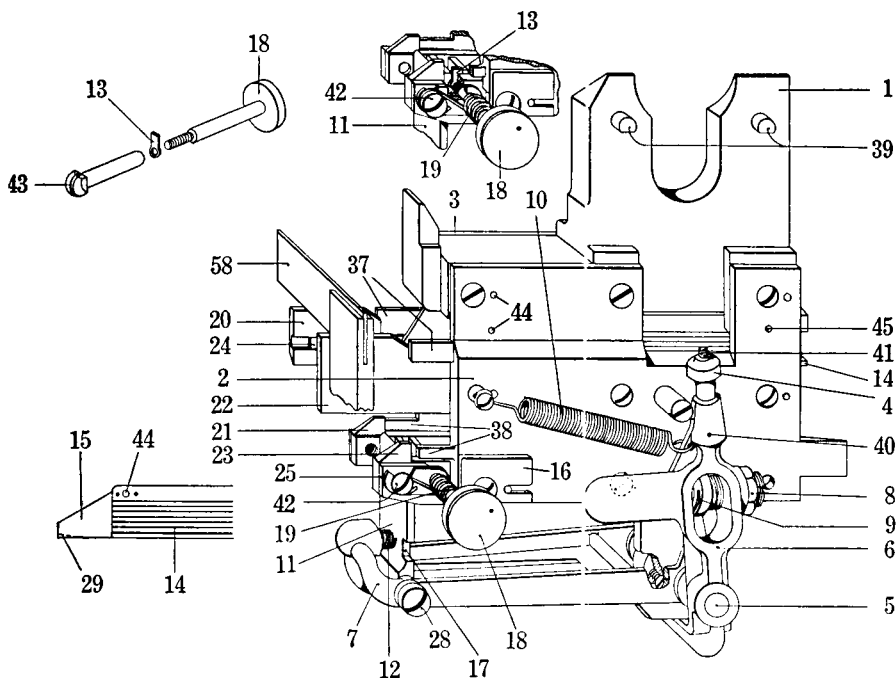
Back view of distributor box used on the single distributor Linotype. 1 is the distributor box bracket having the notch and locating pins for attachment and location on the distributor beam. The bracket 1 carries the distributor box bar 14 on which is the bar point 15. The bracket 1 also carries the front plate 3 and the back plate 2.
